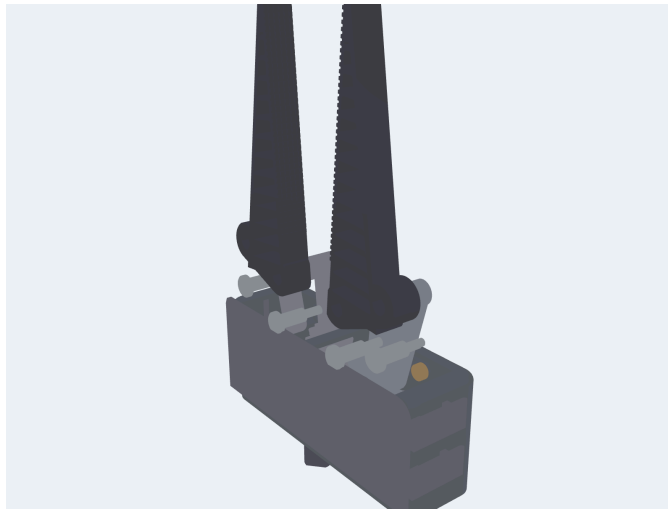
Exploded view of the drive mechanism. The axle pins pull out to reveal the two sector gears, the four-bar links, and the crown-pinion stage; the input shaft exits the bottom face of the housing.
